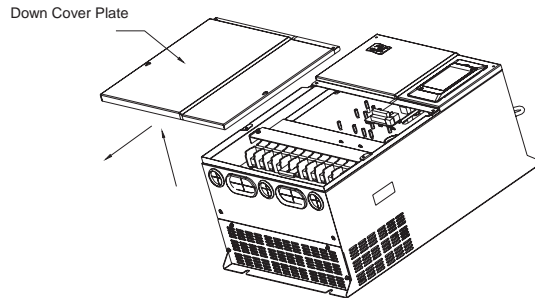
Removing the Down Cover Plate of Sheet-Metal Enclosure
